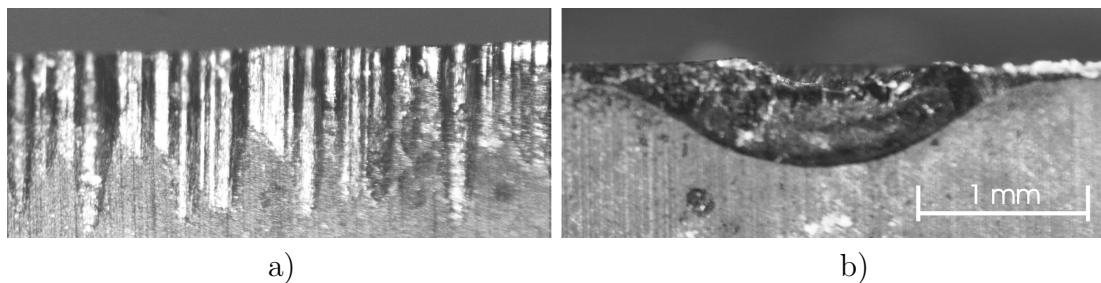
Flank wear for conventional cutting after length cut of ≈ 6 m, for 30m/min: a) abrasive wear, b) thermal damage brought about by edge chipping.
